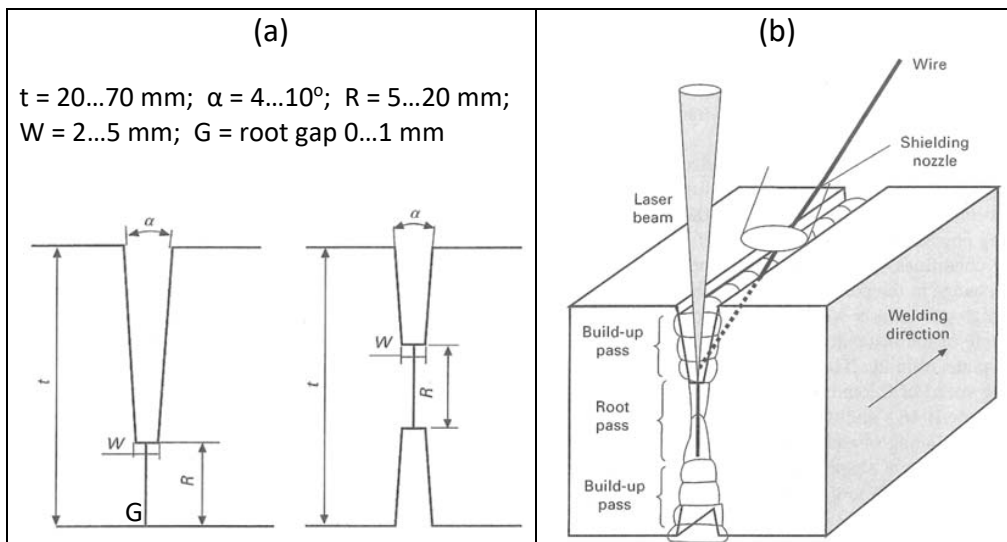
(a) Examples of groove configurations used in multi-pass laser welding; (b) Schematic presentation of multi-pass laser welding with filler wire from both sides. (Zhang, 2013)
